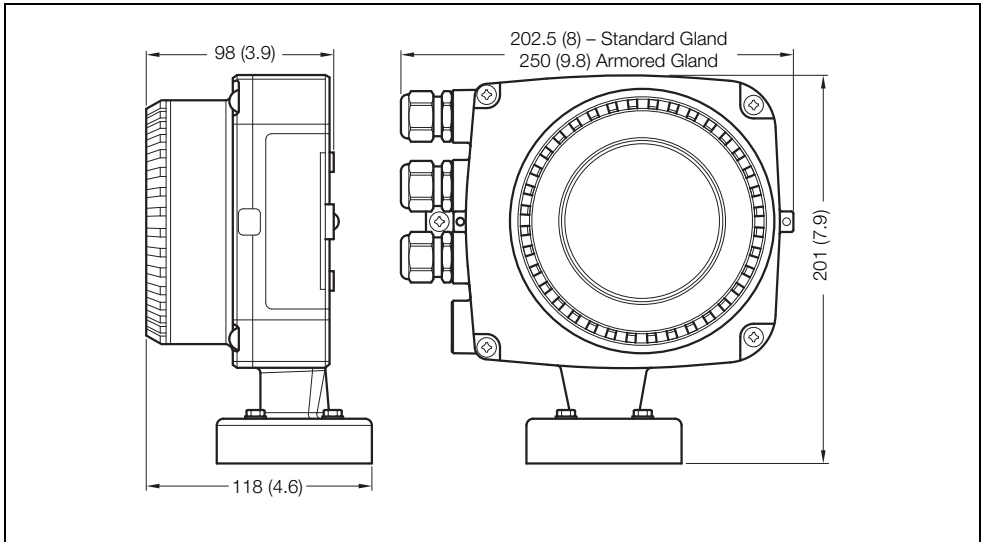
Integral Transmitter Dimensions (Standard Gland Shown)
